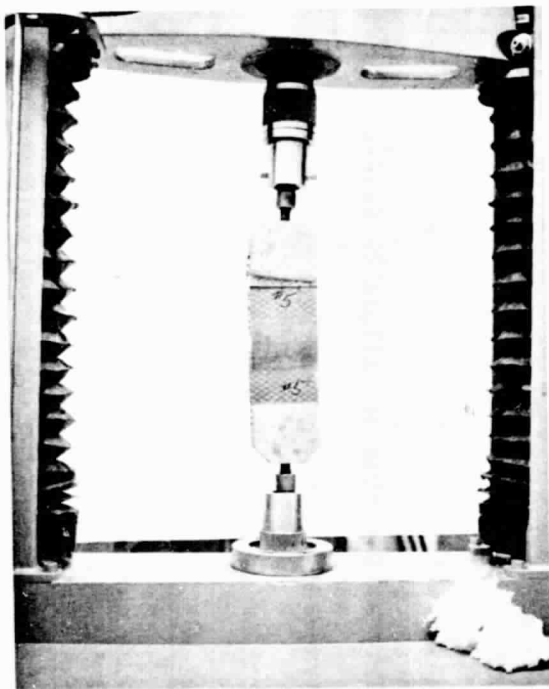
Inlet Manufacturing Joint: Test Failure No. 1.
